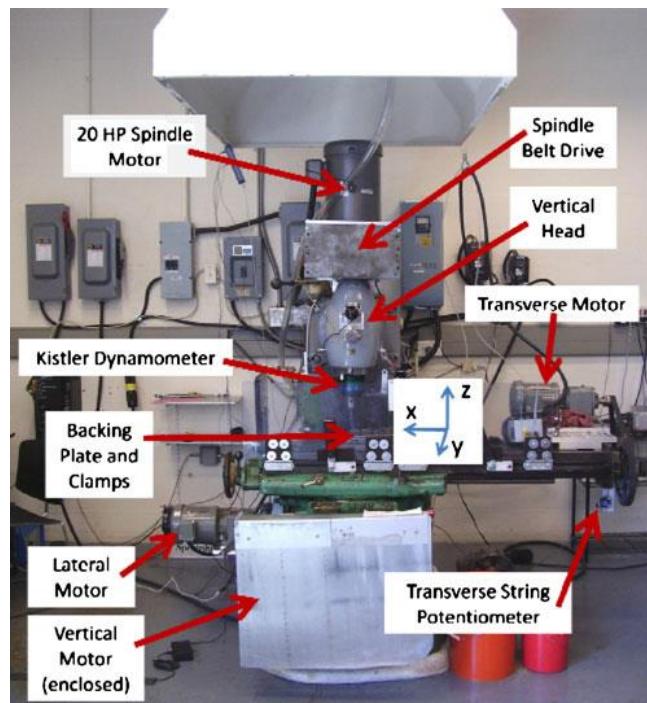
Example of FSW system configuration – Courtesy of [1-24]
